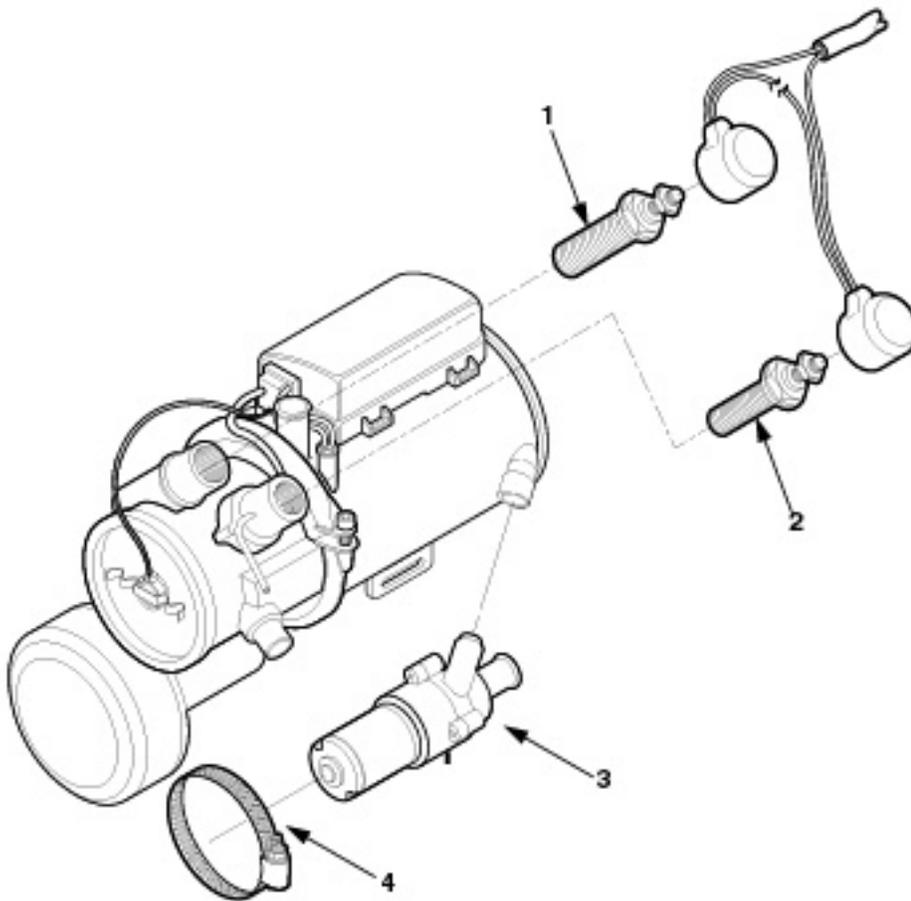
Heater Assembly, NSN: 2990-01-483-4051, PN: 25 1733 01
